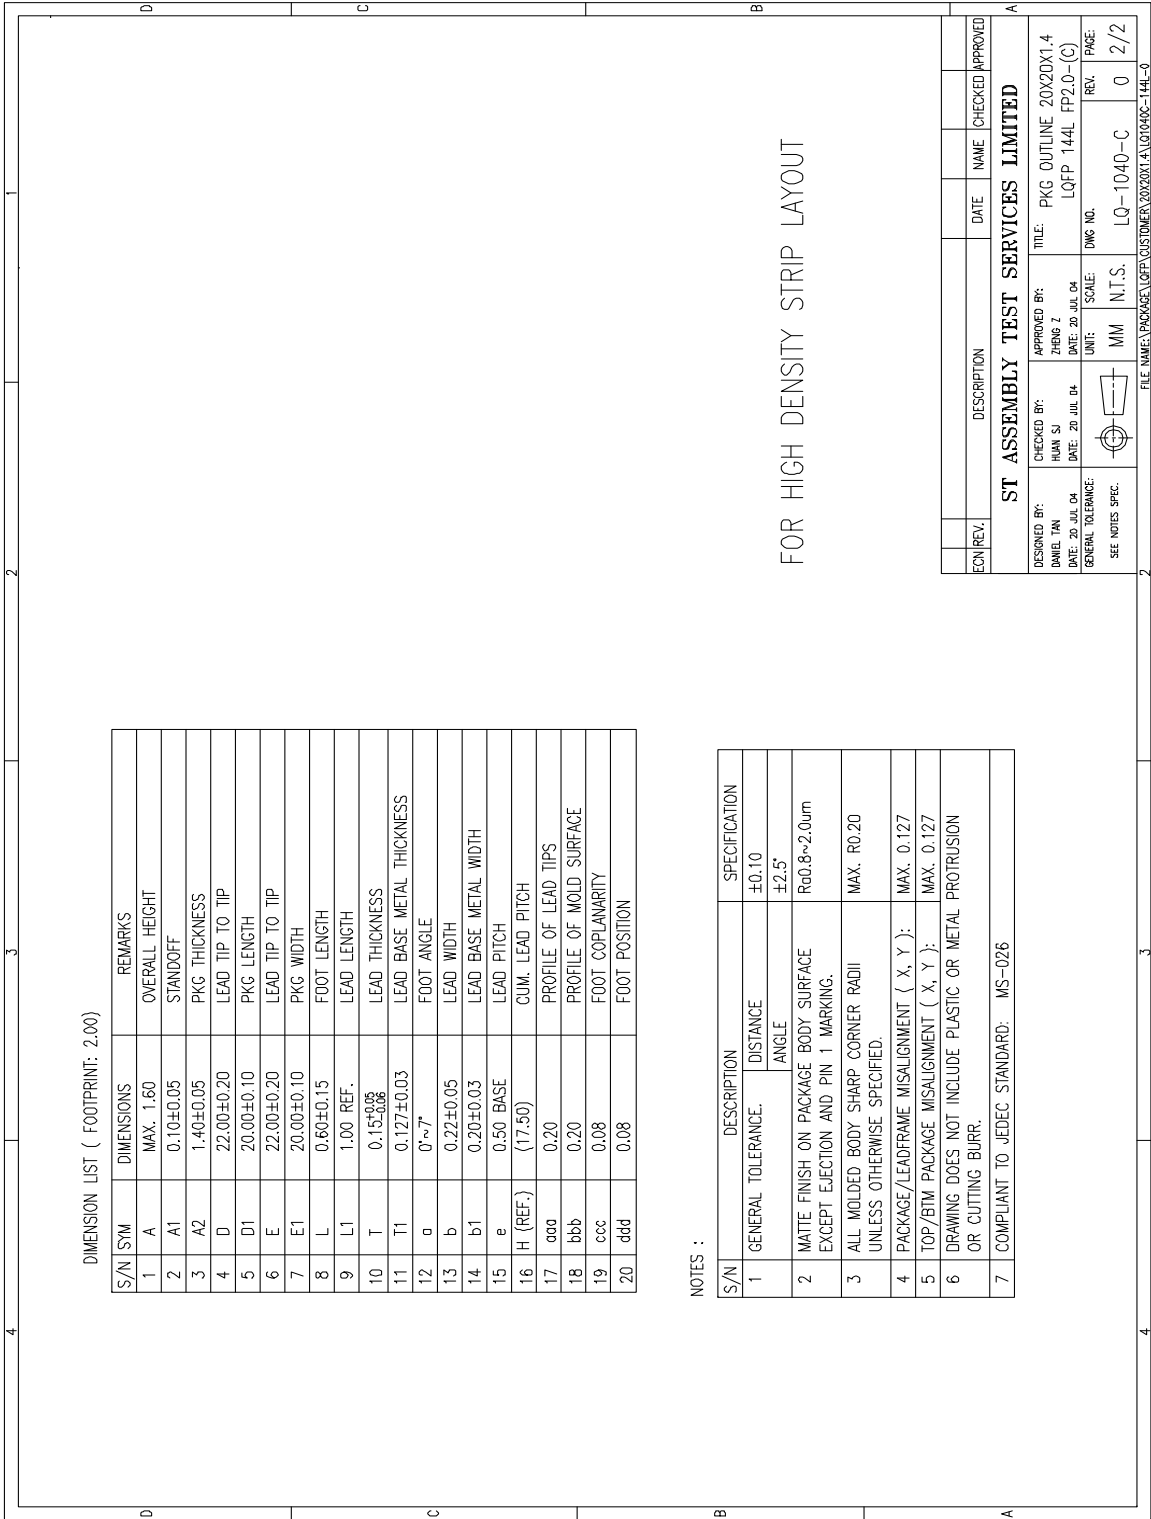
144-Pin Package Outline Drawing (2 of 2)
